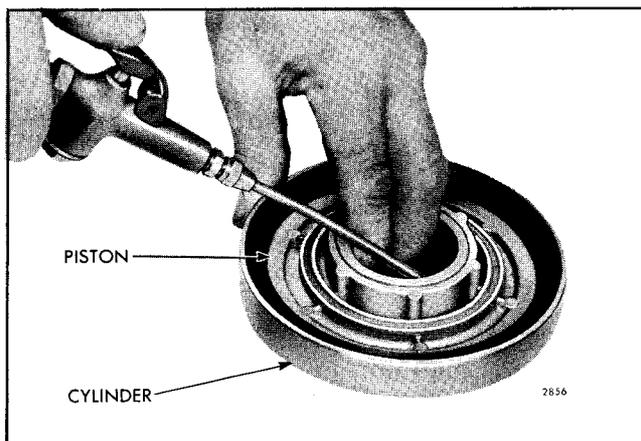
Removing Forward Clutch Piston from Forward Clutch Piston Cylinder
